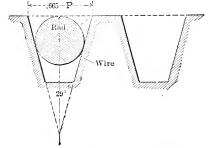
Measuring Brown & Sharpe Worm Threads.
